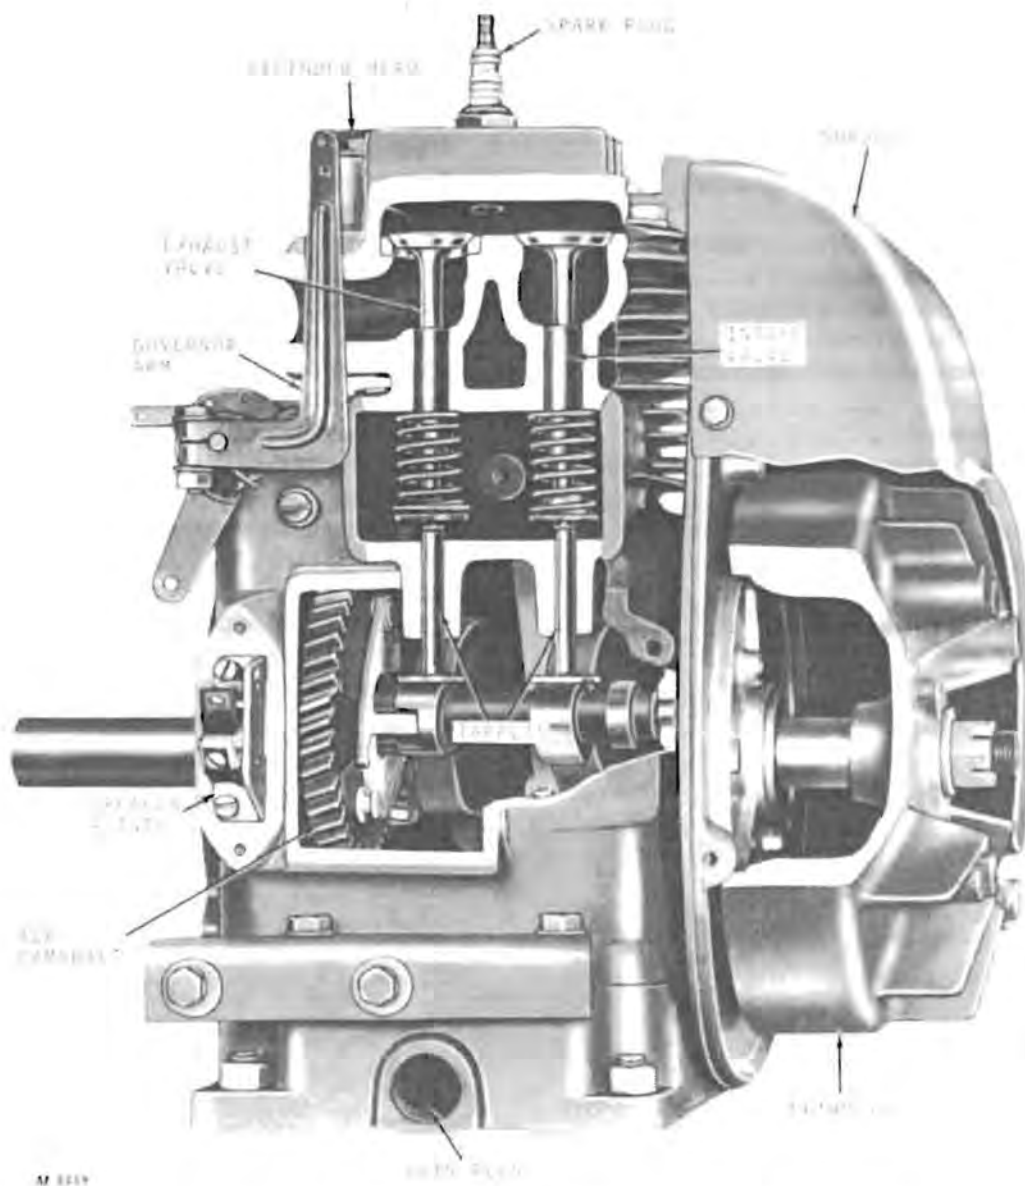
Cutaway View of Kohler K181S Engine Showing Valves and Tappets
